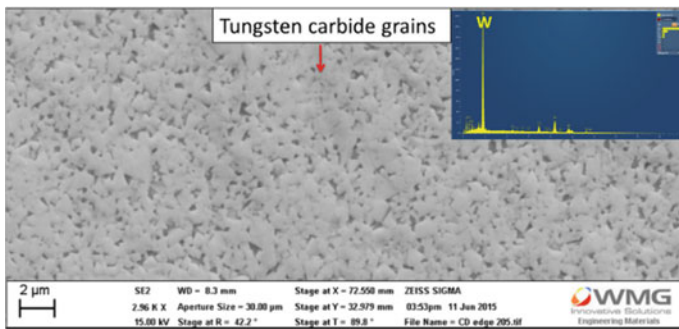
Abrasive wear on the tungsten carbide tool surface
